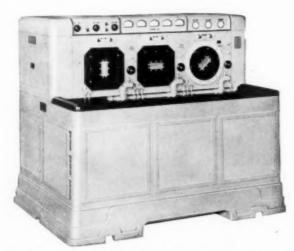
Completed TOCCO Induction Heating Machine with former base.
